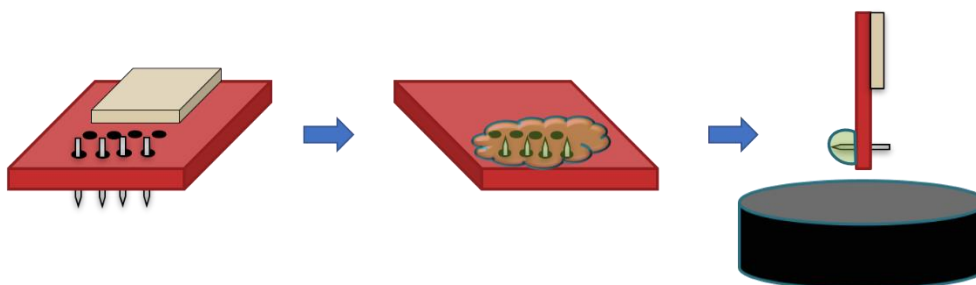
2nd gen. EP chip assembly procedure. The pre-cut needles are attached to the PCB by using a light-curable polymer. The tips of the needles are covered entirely. Then, the chip is dipped into the solder bath for a few seconds.
